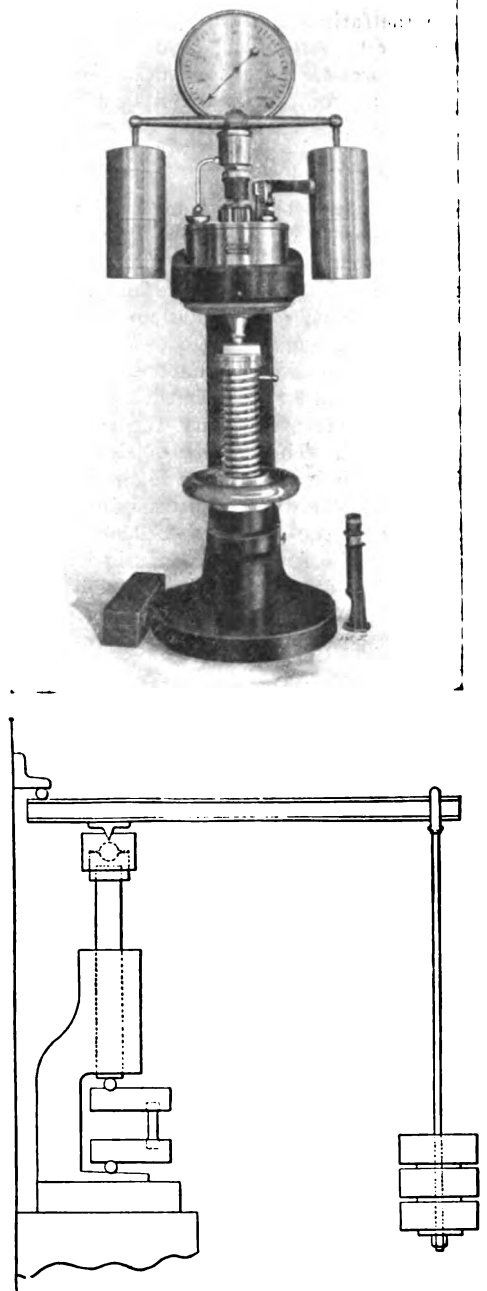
Diagram of machine for bending tests, showing how the test piece is held in jaws and the system of levers
